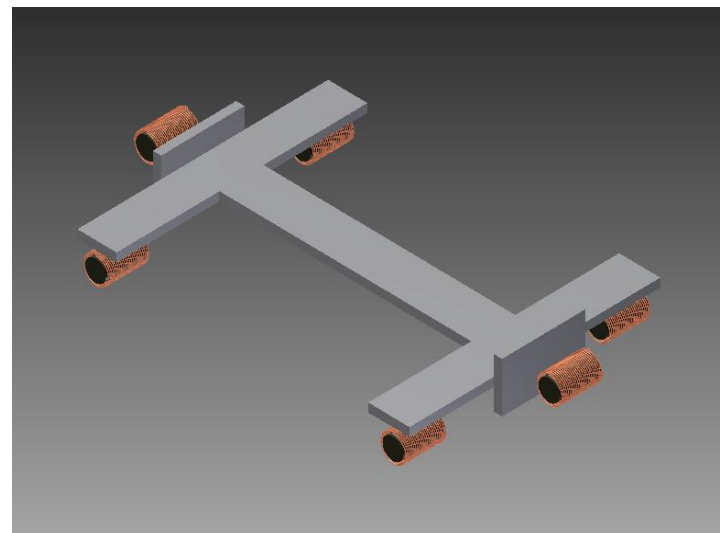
CAD Drawing of 3 Degree of Freedom Design
